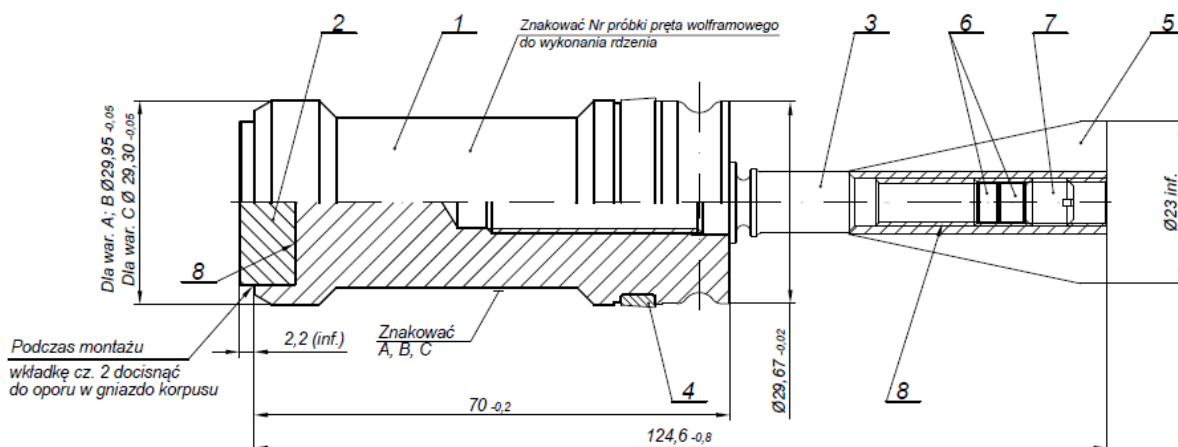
Design drawing of testing cartridge: 1 – projectile with the penetrator made of investigated material, 2 – case used in 30mm APFSDS-T cartridge, 3 – powder charge, 4 – sealing ring
